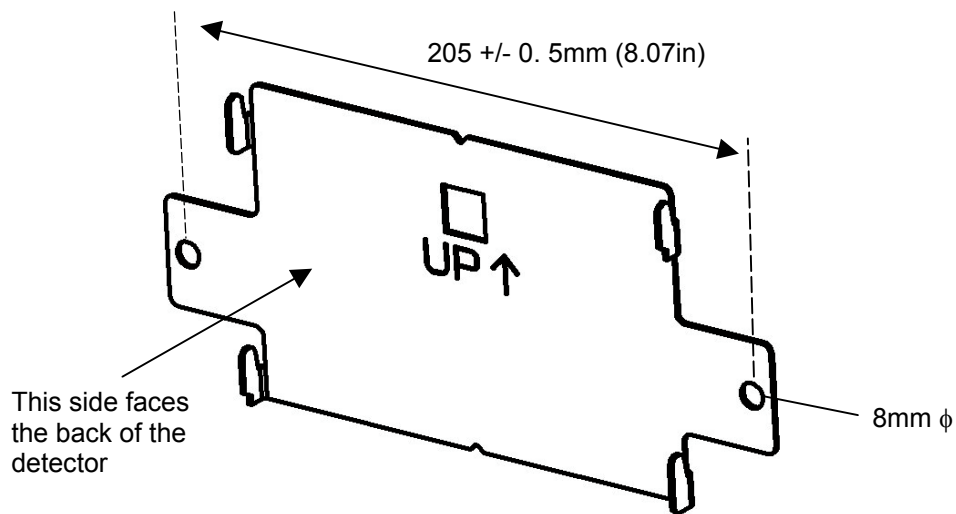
Hole Dimensions and Orientation of Mounting Bracket
